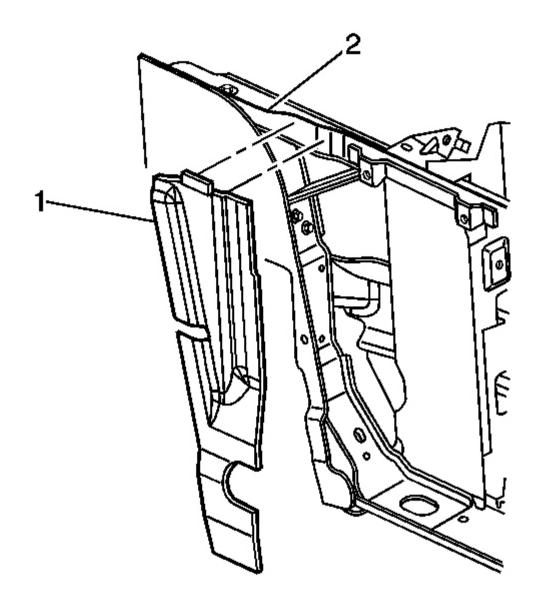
Radiator Air Baffles Courtesy of GENERAL MOTORS CORP.
